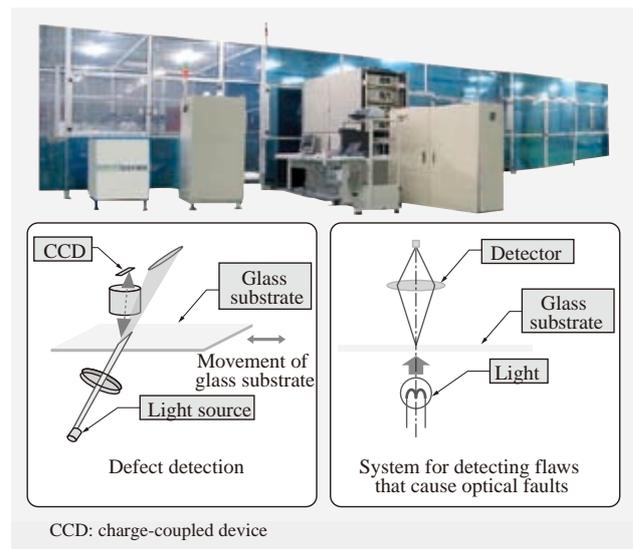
GK8000 Glass Defect Inspection System and its Detection Mechanism.
